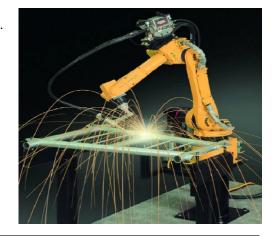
Robotic Welding (by Orange Indus, CC BY 3.0)
